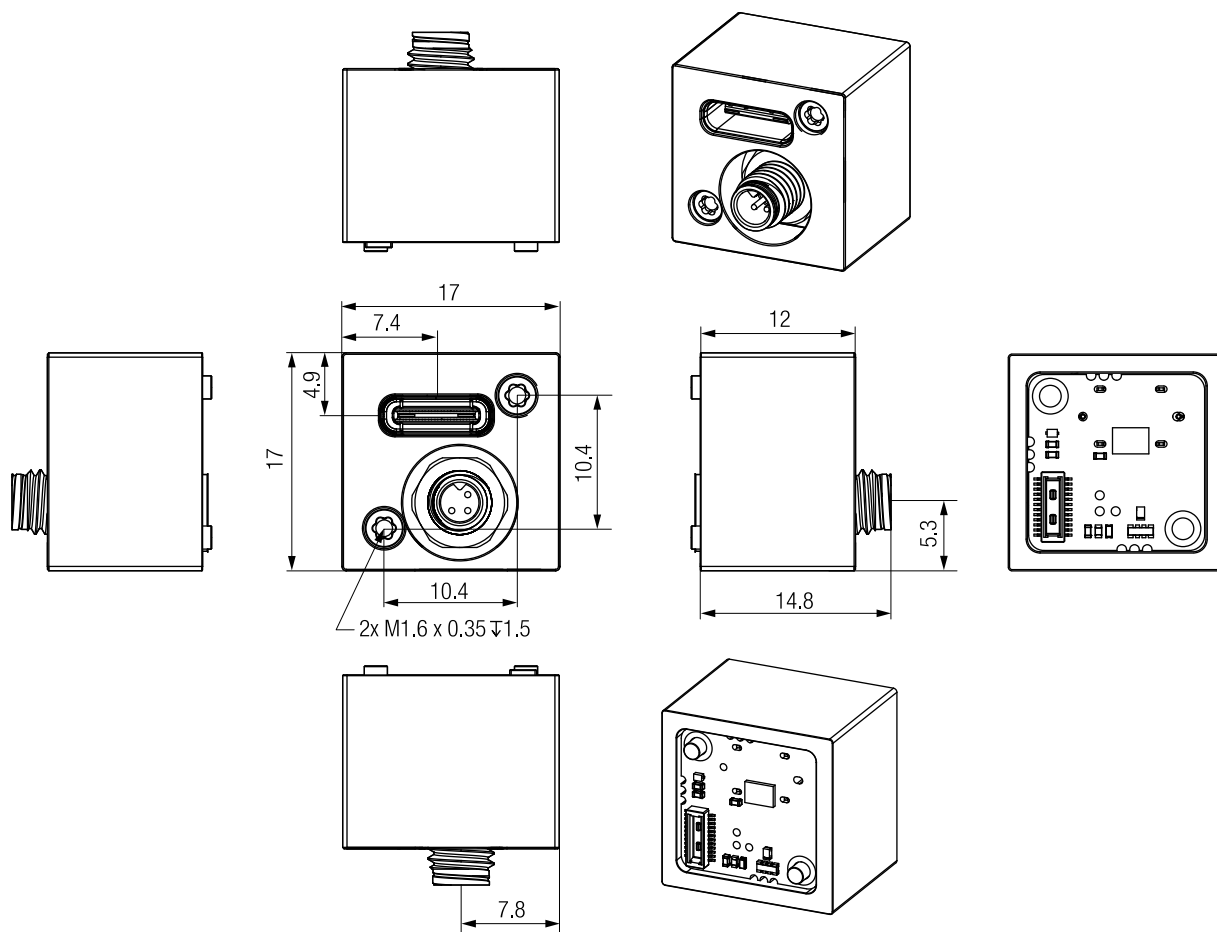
Dimensions of ADPT-MU-17X17-CX3-TC-V
